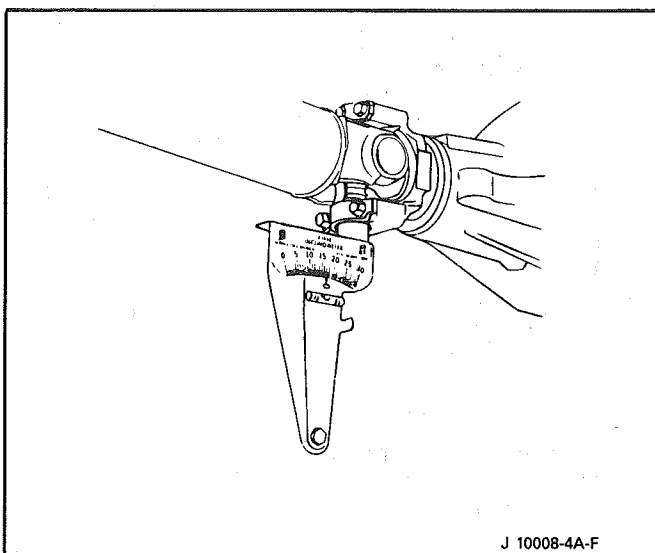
A-8 Angle Measurement at Comp. Flange Brg. Cap
